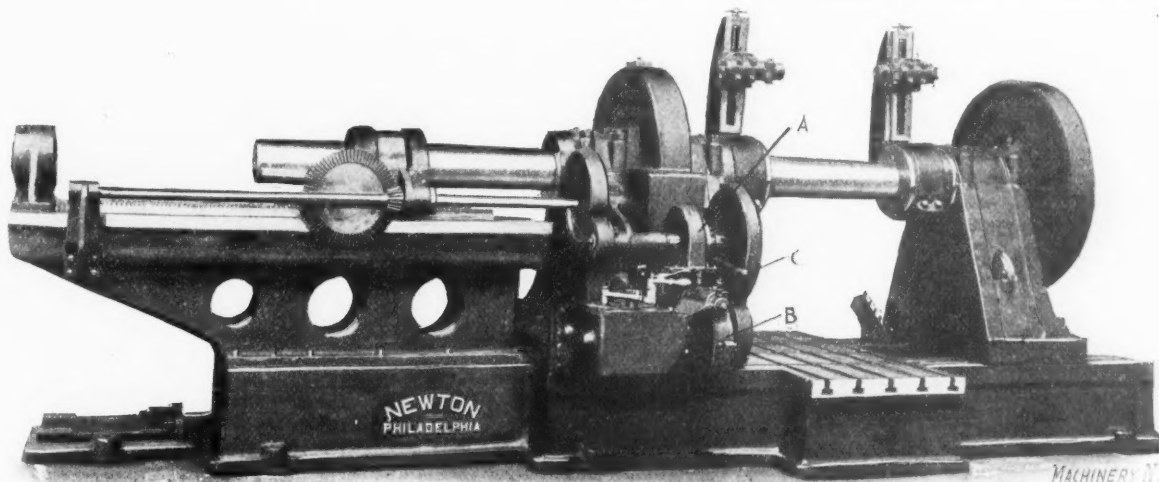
Front View of the Latest Design of Newton Cylinder Boring Machine
